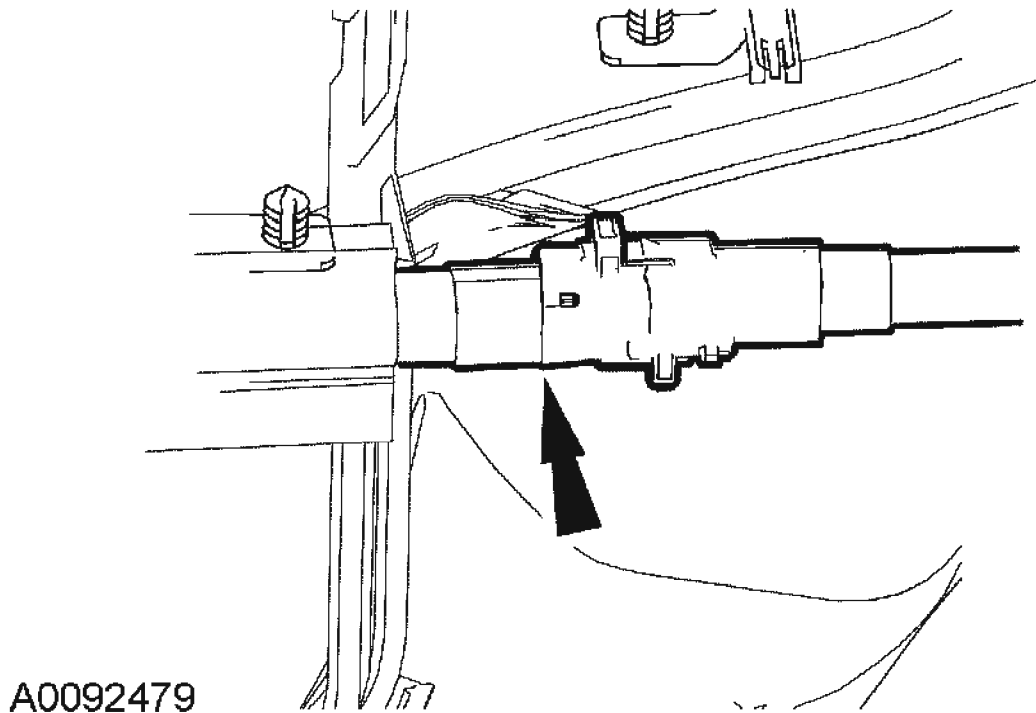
Disconnecting Fuel Pump Module Electrical Connector
